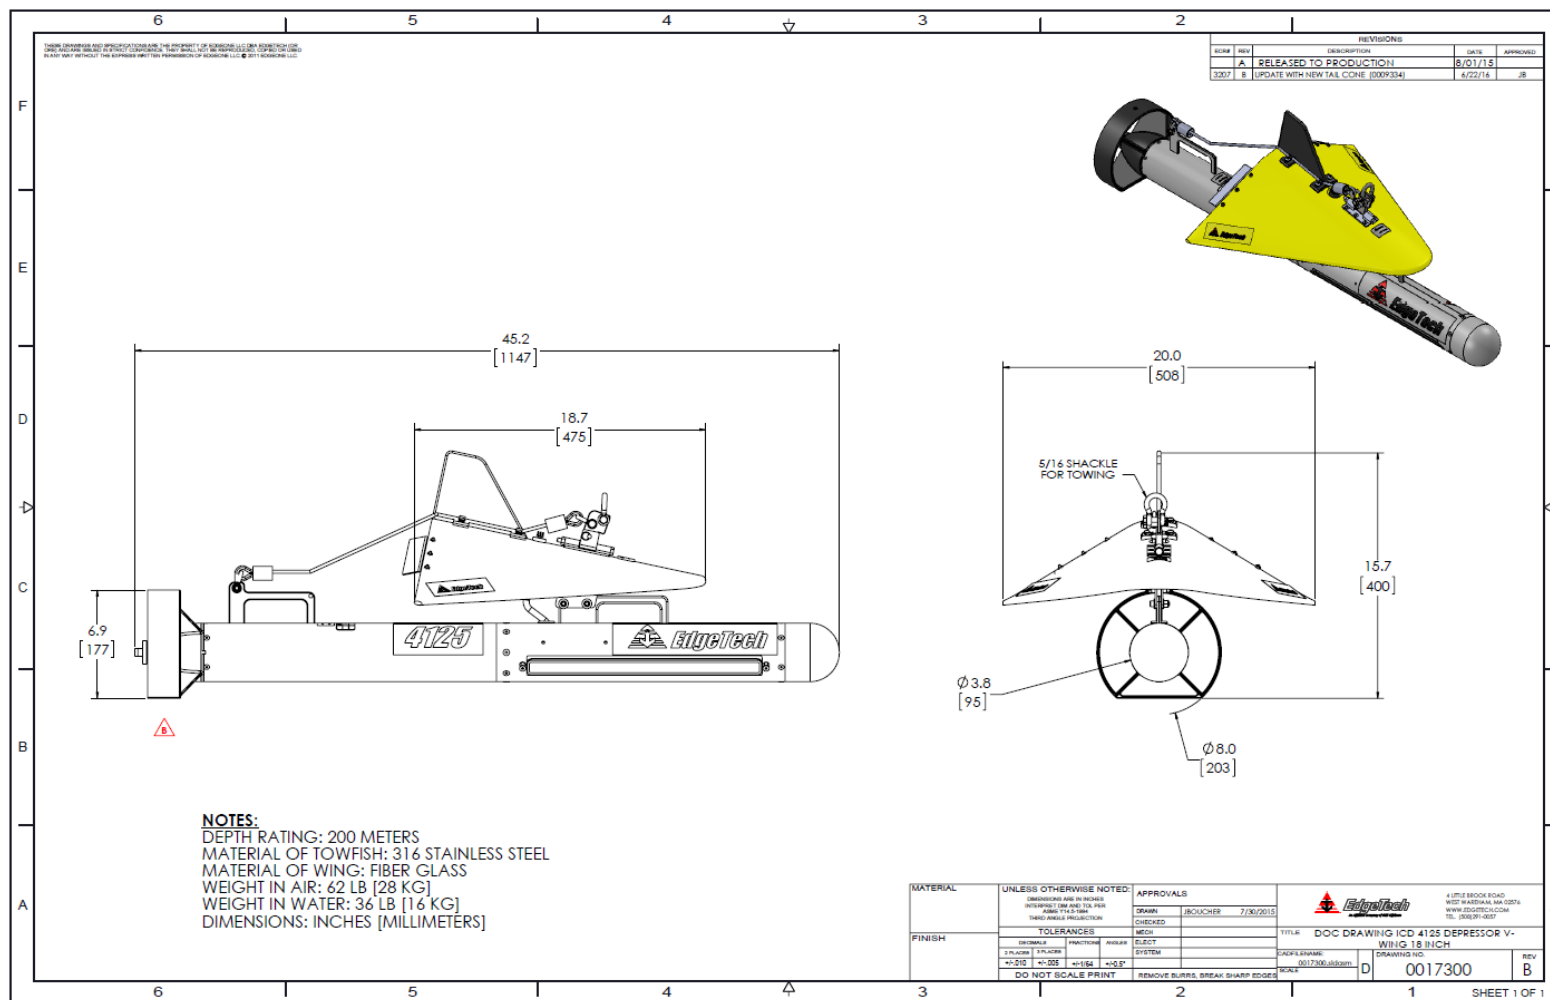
4125i with Depressor Wing ICD Drawing
